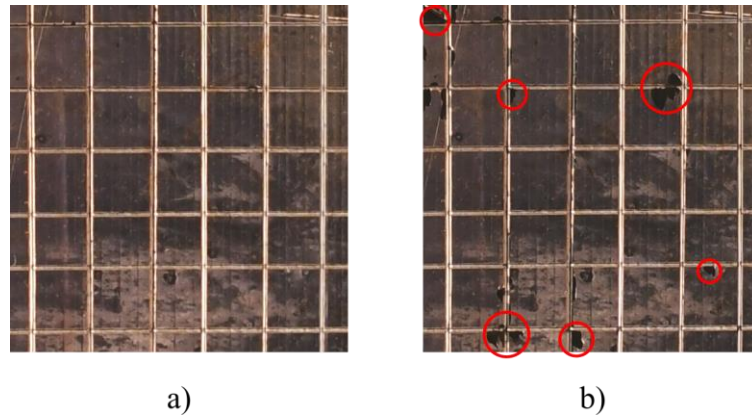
Copper plated sample a) before and b) after ASTM D3359 peel test
